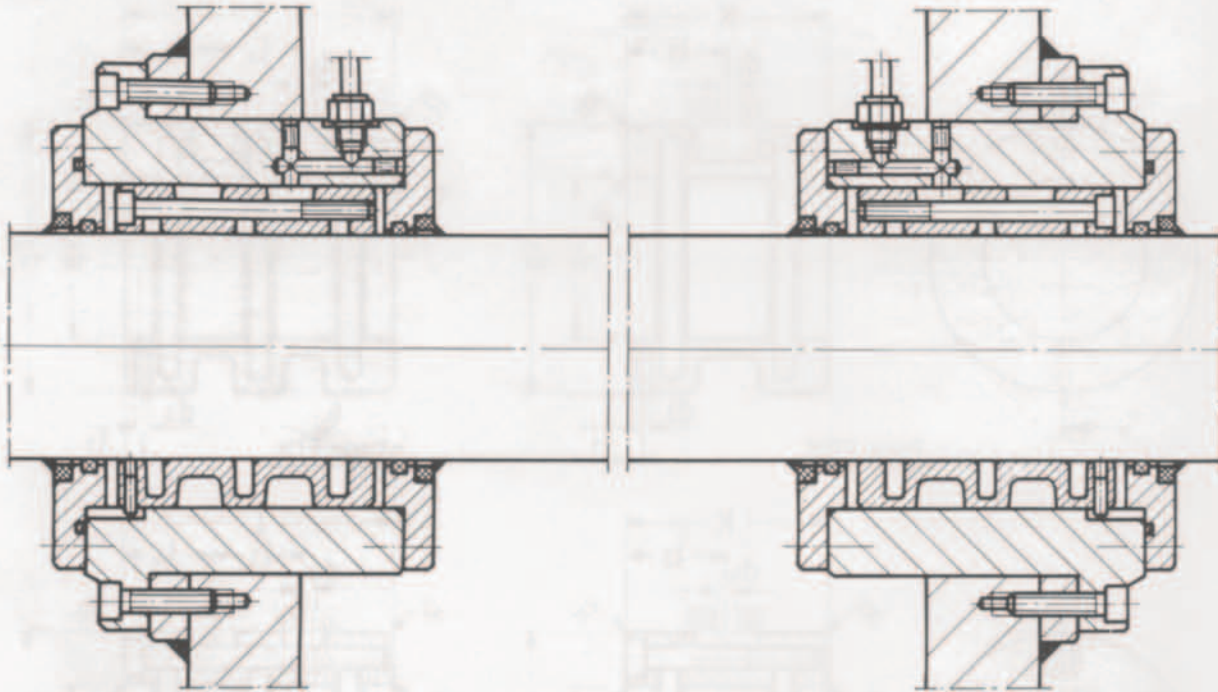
Adjustment of Guide Clearance by Means of a Threaded Retainer:
